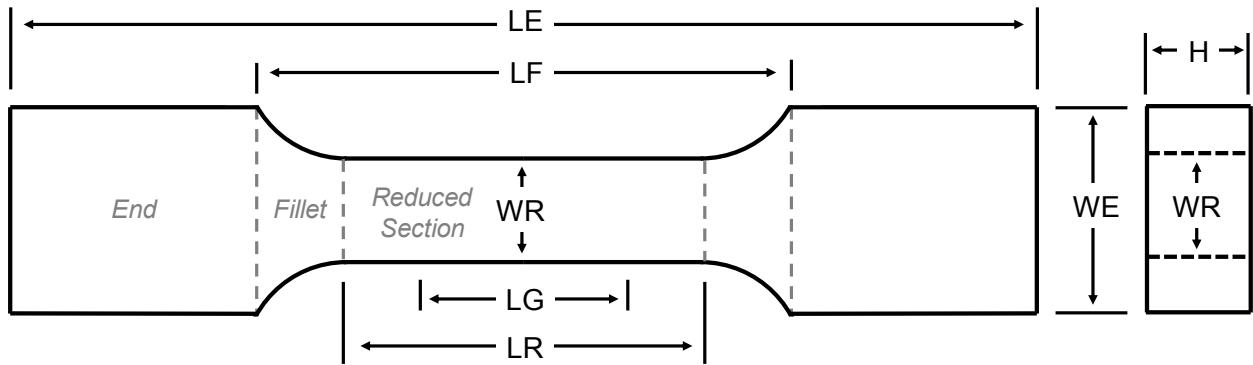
Schematic drawing of the rectangular dogbone tensile specimens.
